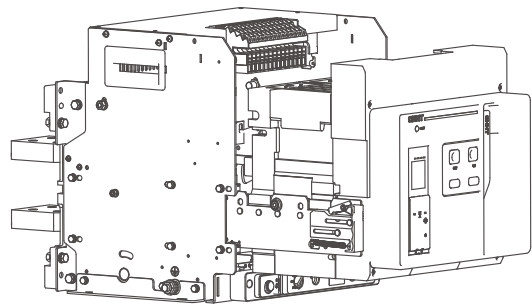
Putting the Circuit Breaker Into the Drawer Seat
